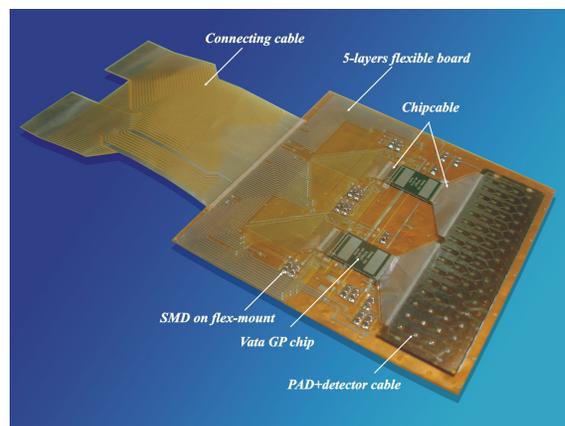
Detector cable and chip cable assembly TABed to a very thin PCB
